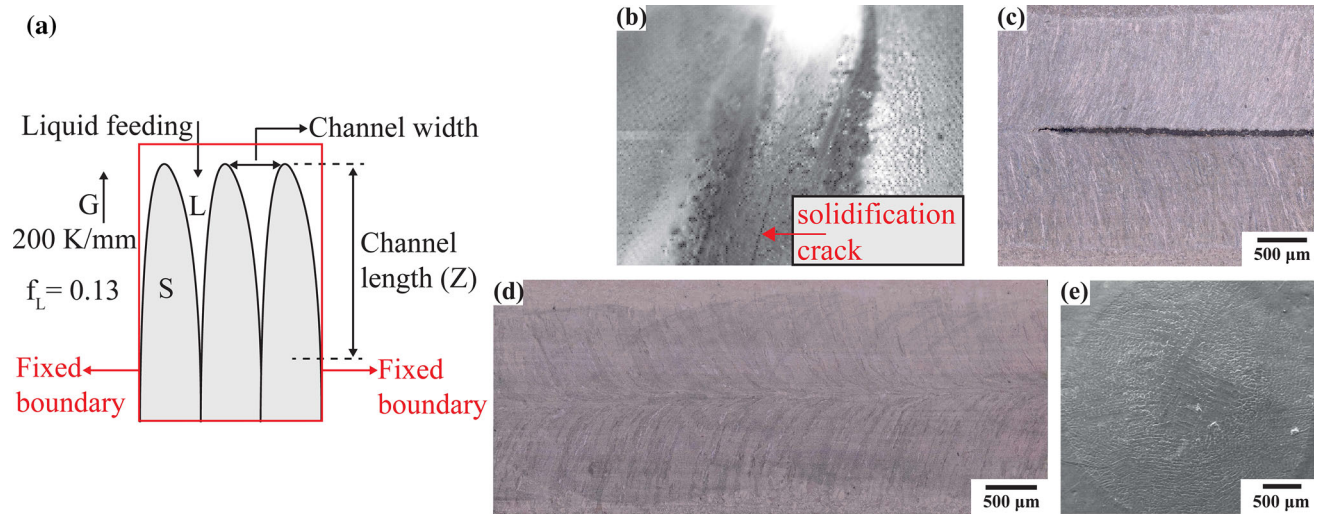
(a) Schematic illustrating the solidifying morphology and boundary conditions. Please refer to Fig. 1(c), (b) high-speed camera image taken during welding of TRIP steel showing solidification cracking, (c) optical macrograph of the weld surface of TRIP steel, (d) optical macrograph of the weld surface of the steel with 0.01 wt pct P, (e) secondary electron image of the steel with 0.01 wt pct P after melt pool solidification.
